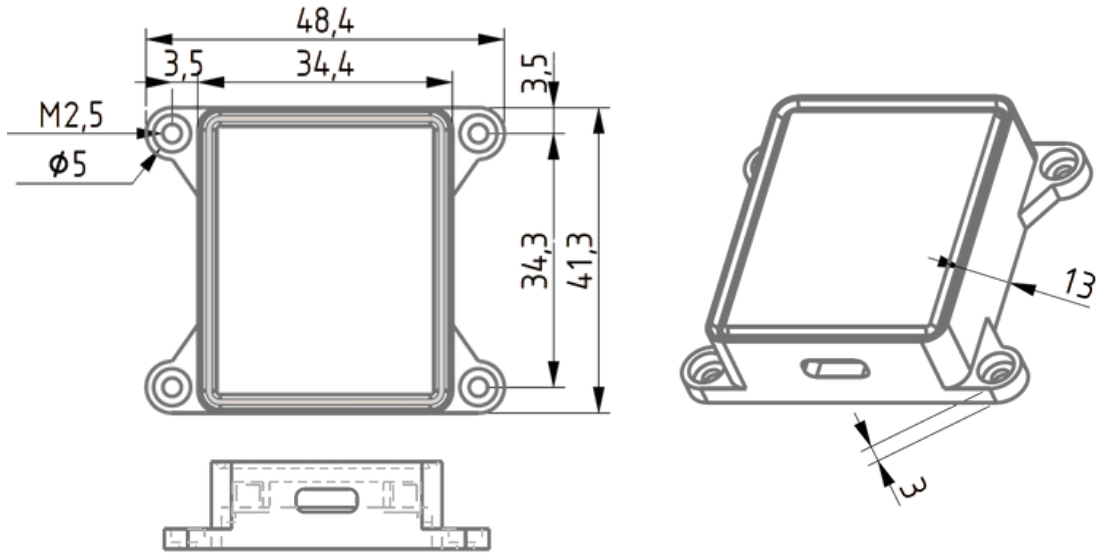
AGM-510/610/720 External Dimensions Specifications (Unit: mm)
